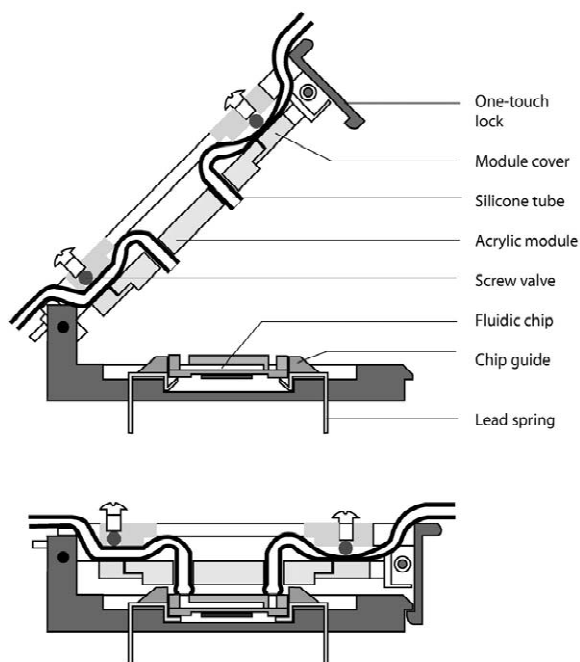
Schematic drawings of the cross-section of the socket mounted with a fluidic chip (not scaled). The upper part shows the structure of the socket. The silicone tubes are extended a little out of the acrylic plate. In the screw valve, a ball is inserted to avoid the damage directly from screw to silicone tube. The chip for testing is aligned easily following the guides and is supported by the lead spring array. The bottom part shows the state for testing. The extended silicone tubes are deformed and serve as O-rings to seal the flow channel ports on fluidic chip. The spring array for electrical connection is contacted firmly to the lead pads formed on the backside of the chip. Both working fluidic and electrical connections are adhesive/solder-free. These structures made it efficiently to mount or dismount a microfluidic device.
